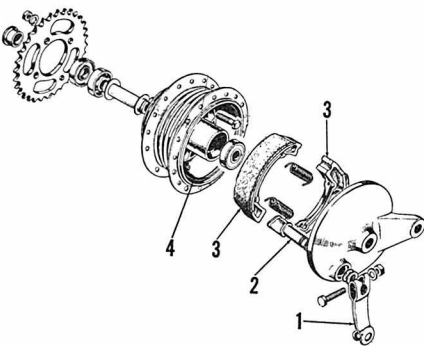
Exploded view of simple rear brake assembly. Front brake may be similar. Lever (1) is actuated by controls and turns cam (2) expanding shoes (3) against drum (4).
